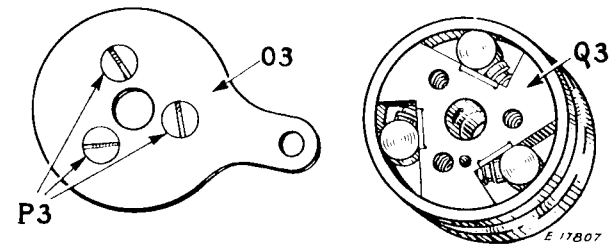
Showing Driving Arm and Correct Position of Driver in the Driving End of the Feed Clutch
